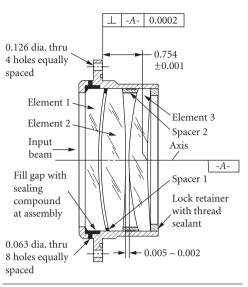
A telescope objective assembly with alignment resulting from tightly toleranced dimensions. Dimensions are in inches. (*From Yoder*.¹⁷)
